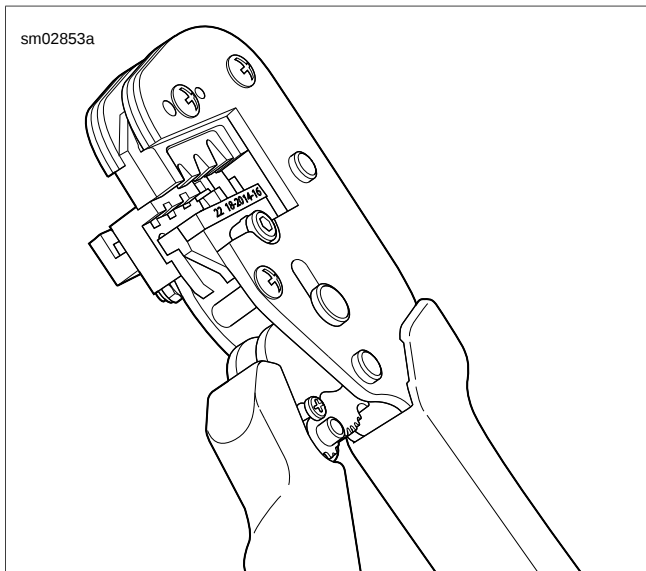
Open Terminal Crimper (HD-48119) at 45 Degrees
